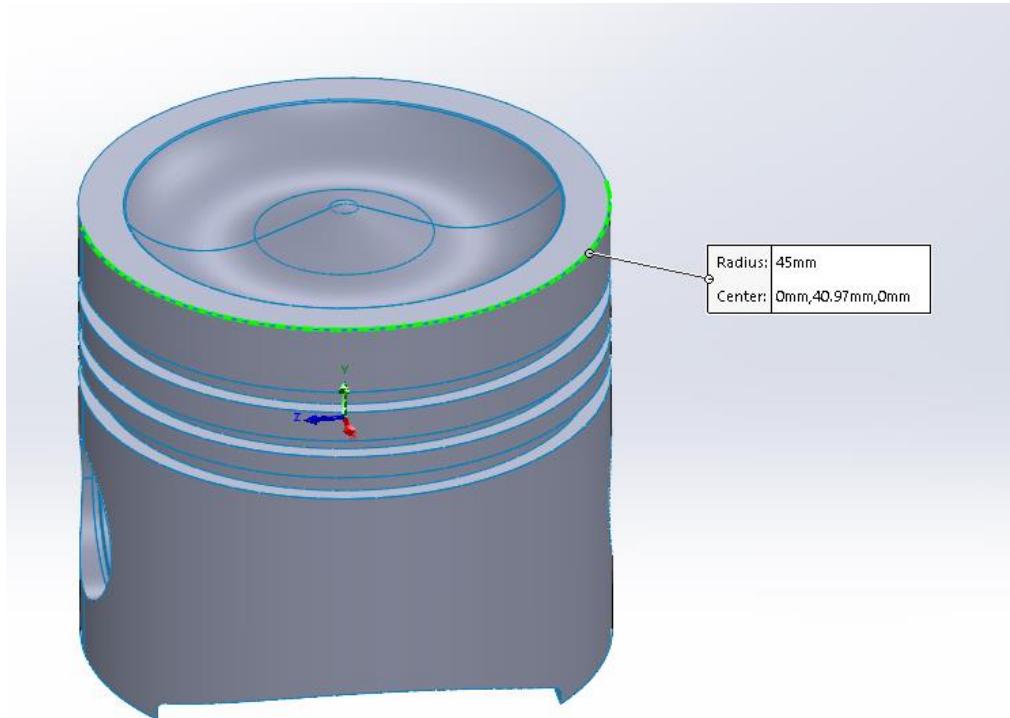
CAD and dimension of the piston designed and to be optimized in previous years.
